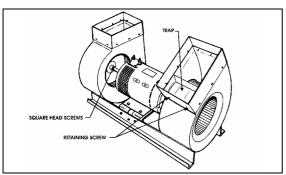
EVAPORATOR MOTOR ASSEMBLY 22
